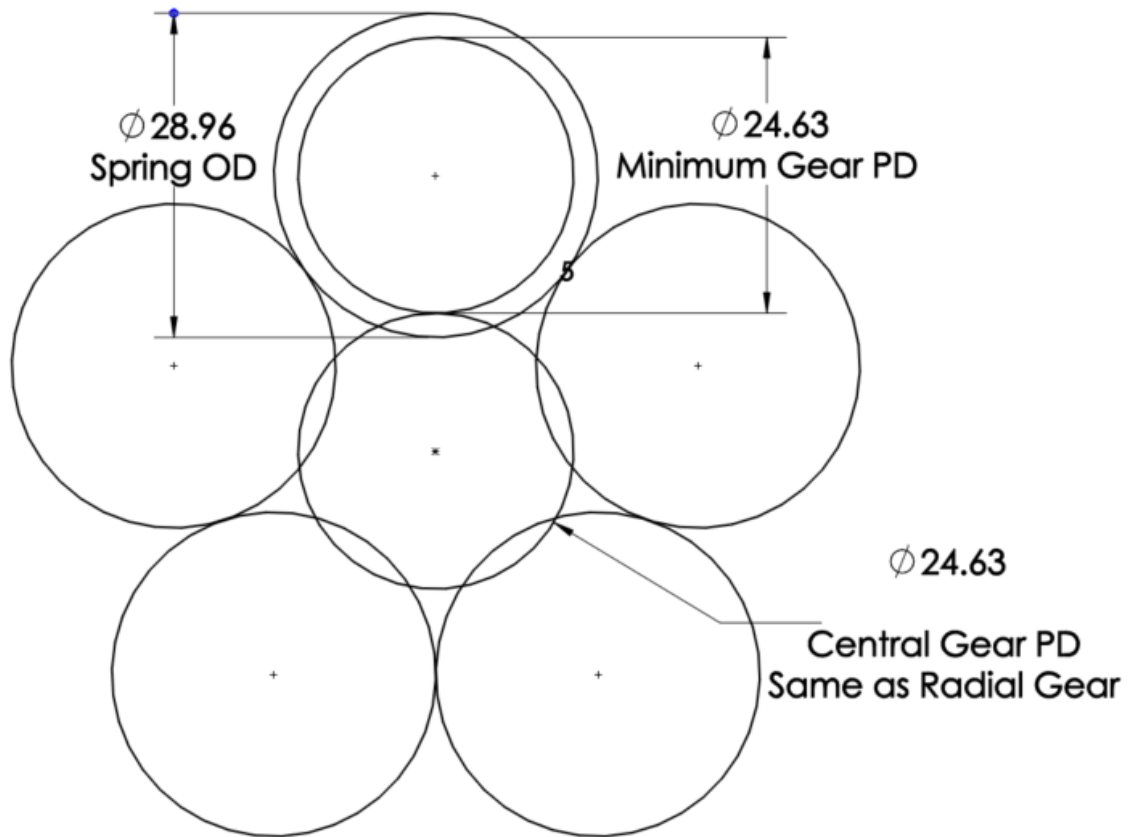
Sketch of spring and gear layout to determine minimum gear pitch diameter (PD)
